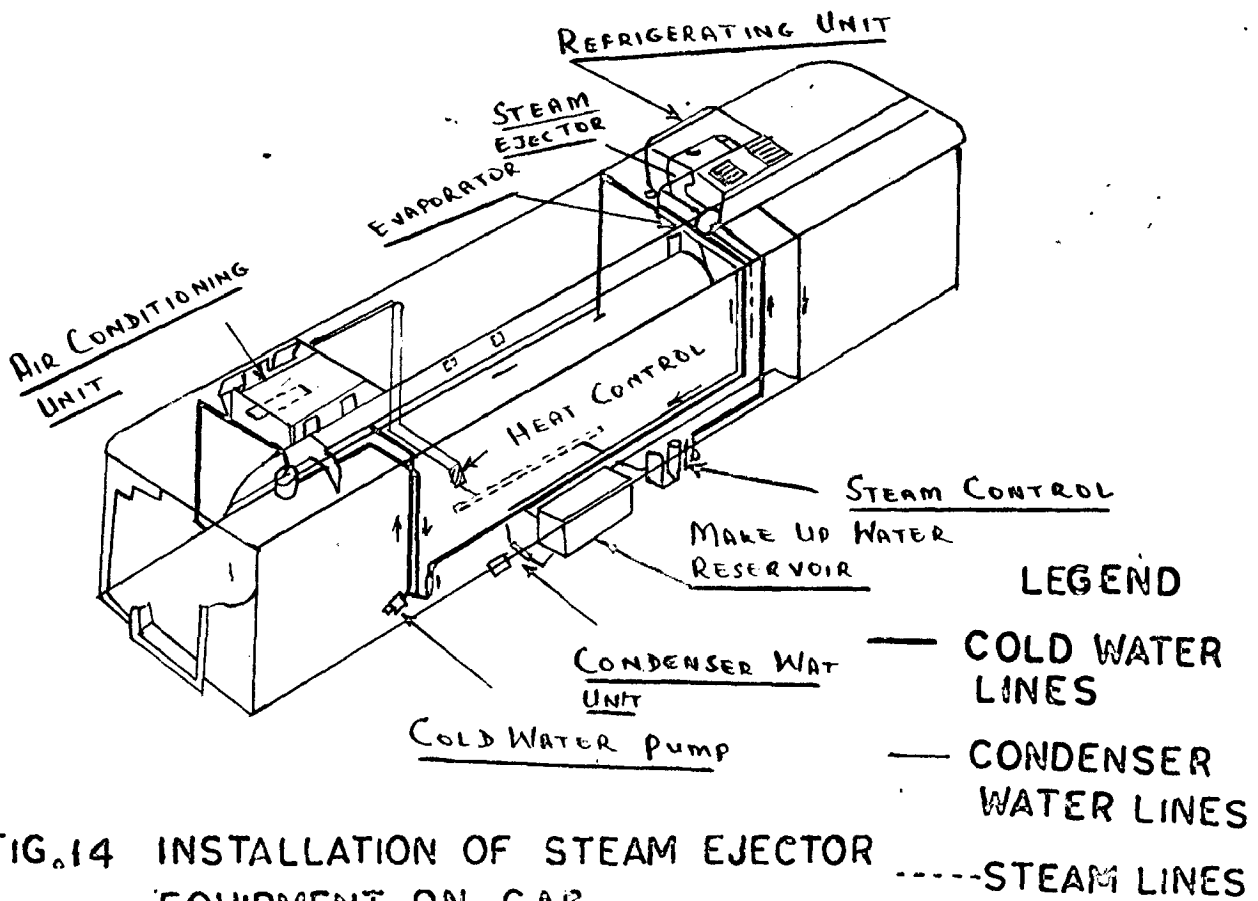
INSTALLATION OF STEAM EJECTOR EQUIPMENT ON CAR
